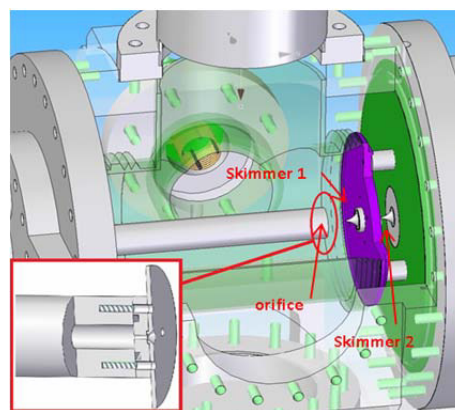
CAD drawing of the nozzle chamber where the first two skimmers are highlighted.
